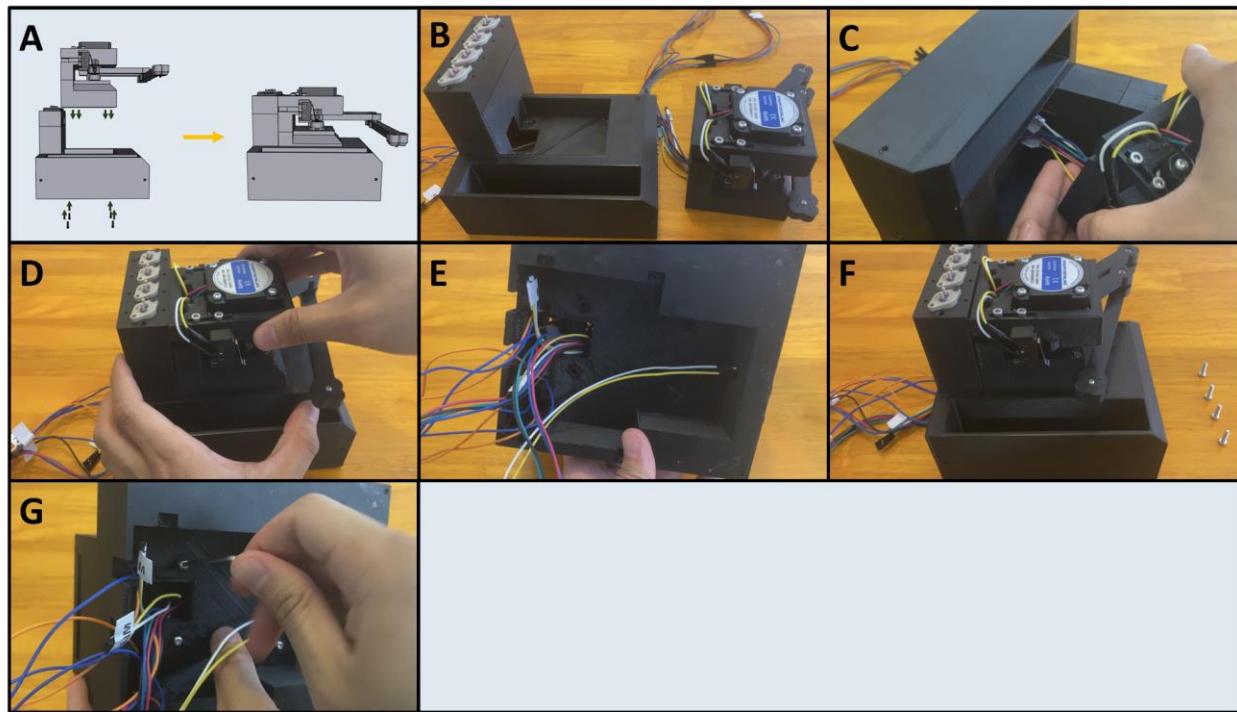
g: The procedure for mounting the Motor Assembly to the base.
